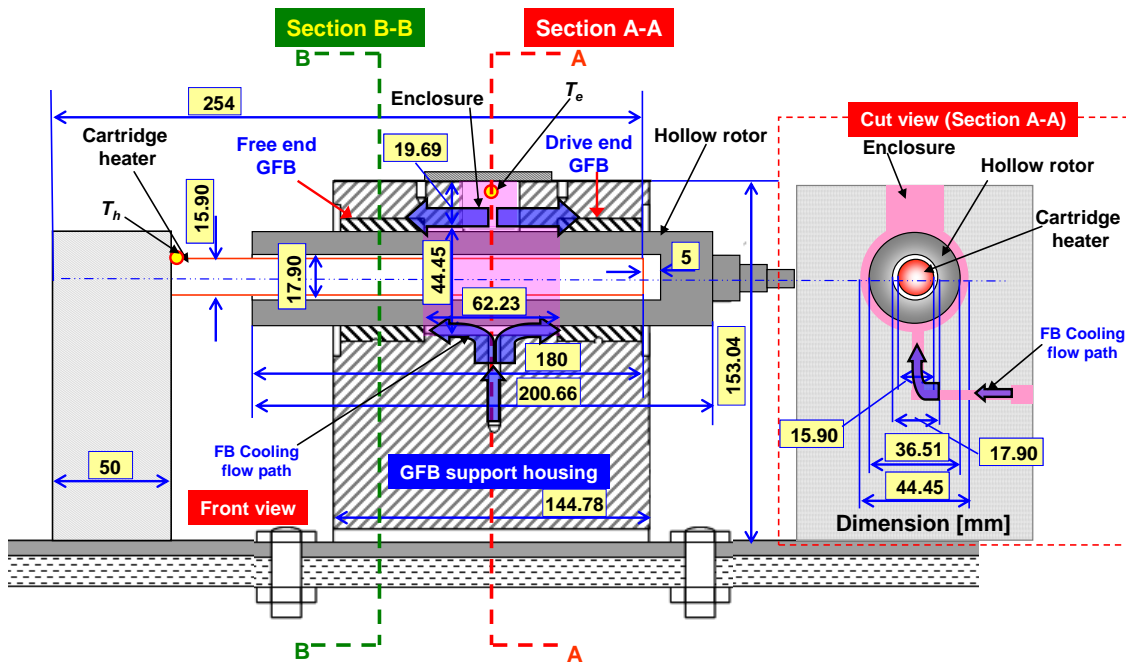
Schematic view (not to scale) for dimensions (mm) of test rotor, cartridge heater, bearing support housing air feed enclosure. Noted locations of thermocouples for feed enclosure air temperature (T_e) and reference to control heater set temperature (T_{hs}).
